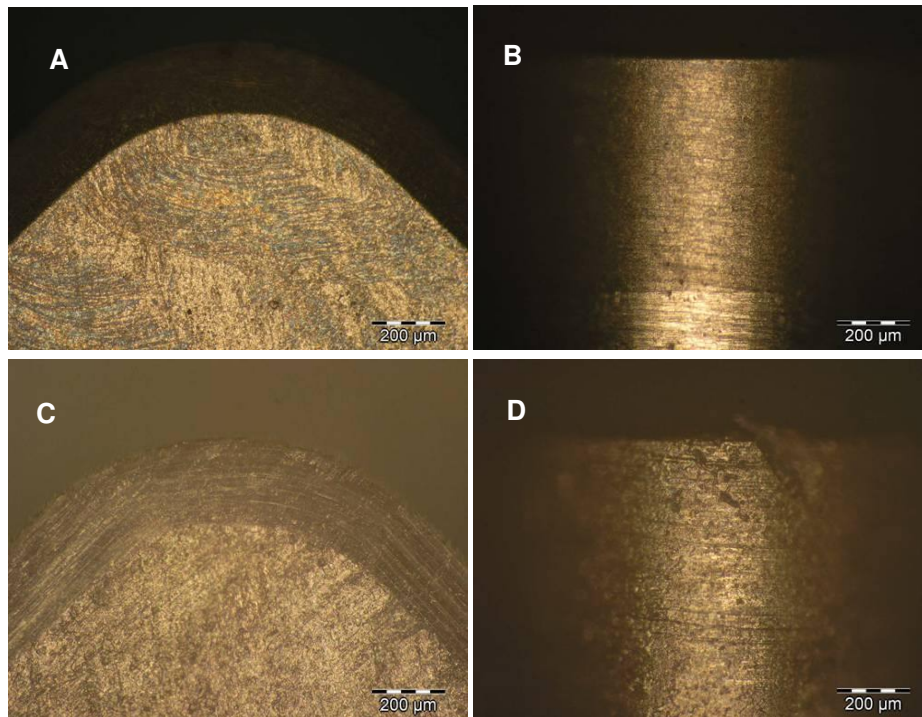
A and B: DBC50 rake face and flank respectively showing good chamfering and honing with insignificant surface imperfections. C and D: $B_6O/Y_2O_3/Al_2O_3$ rake face and flank respectively showing a high degree of deep surface scratching and porosity.
